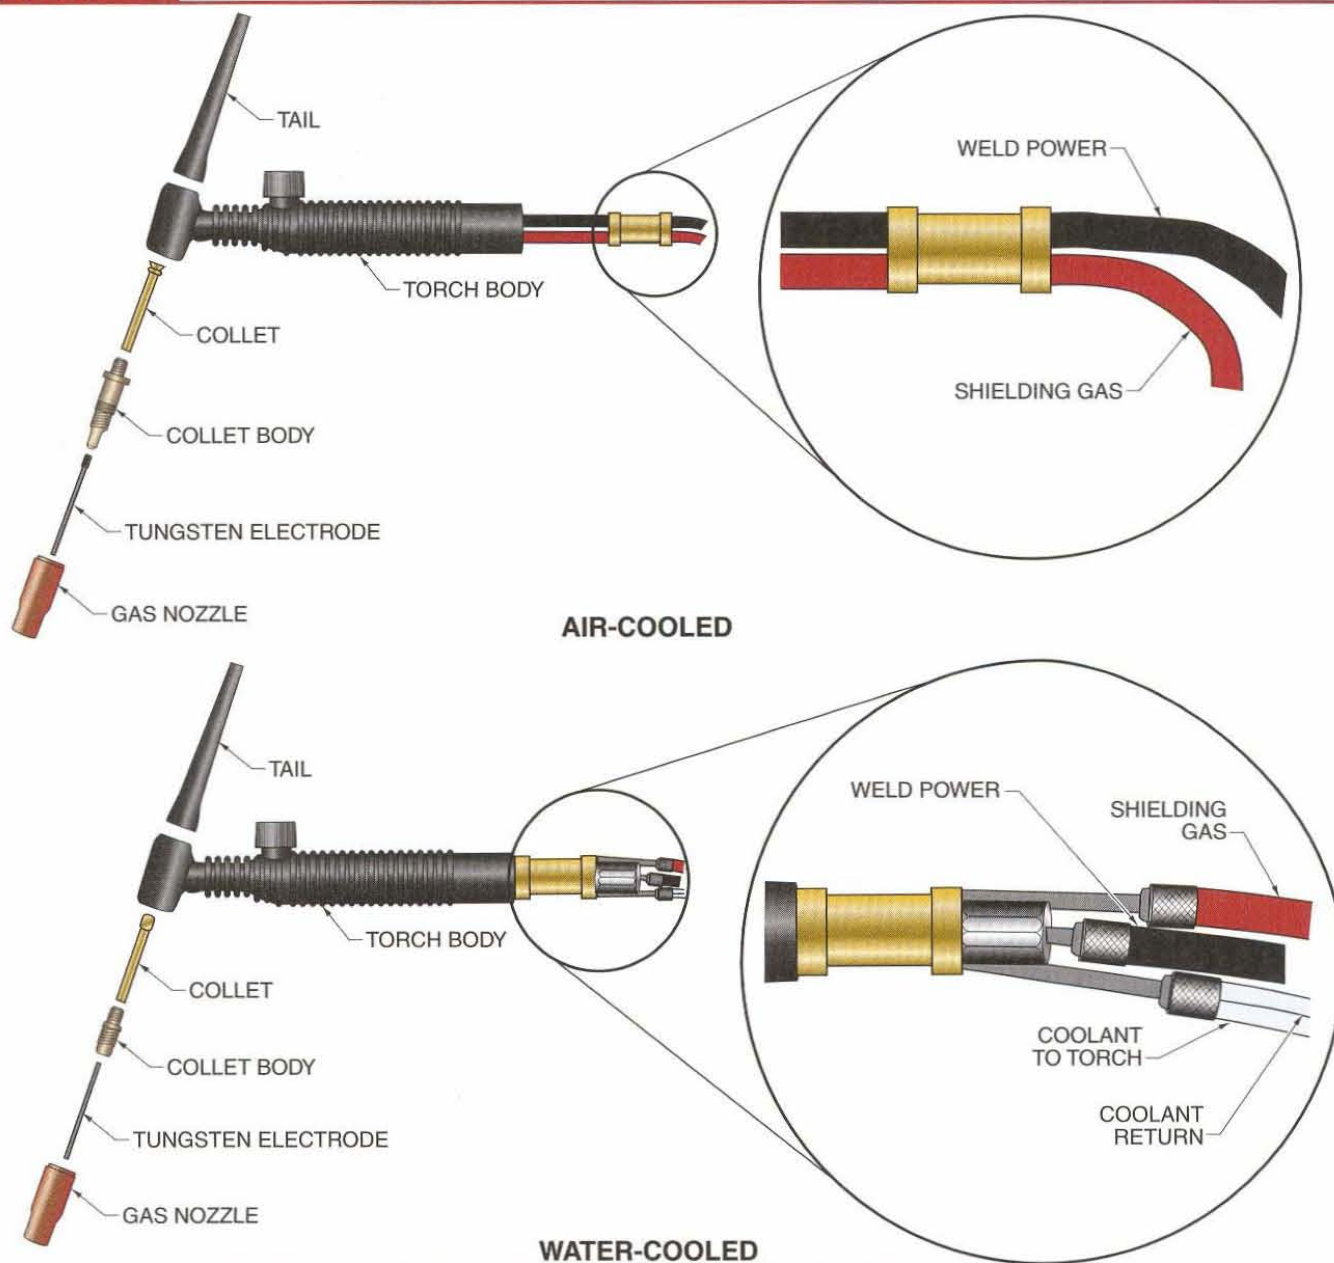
An air-cooled torch is used for welding light-gauge metals. A water-cooled torch prevents overheating when welding requires current above 200 A.
